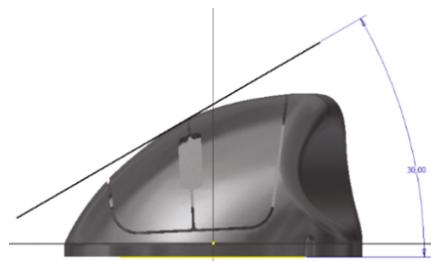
ch concept frontal view obtained from 3D-CAD model (slanted angle of about 30°).
